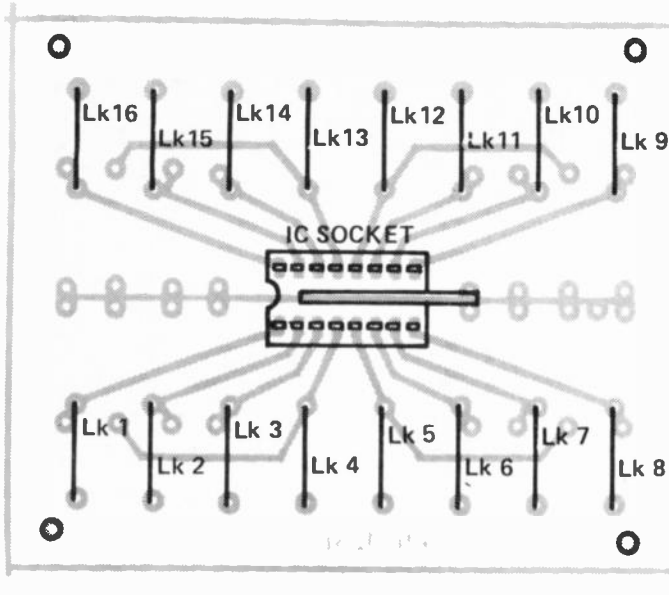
Component overlay for the test-socket board ETI-123b, non-copper side.
